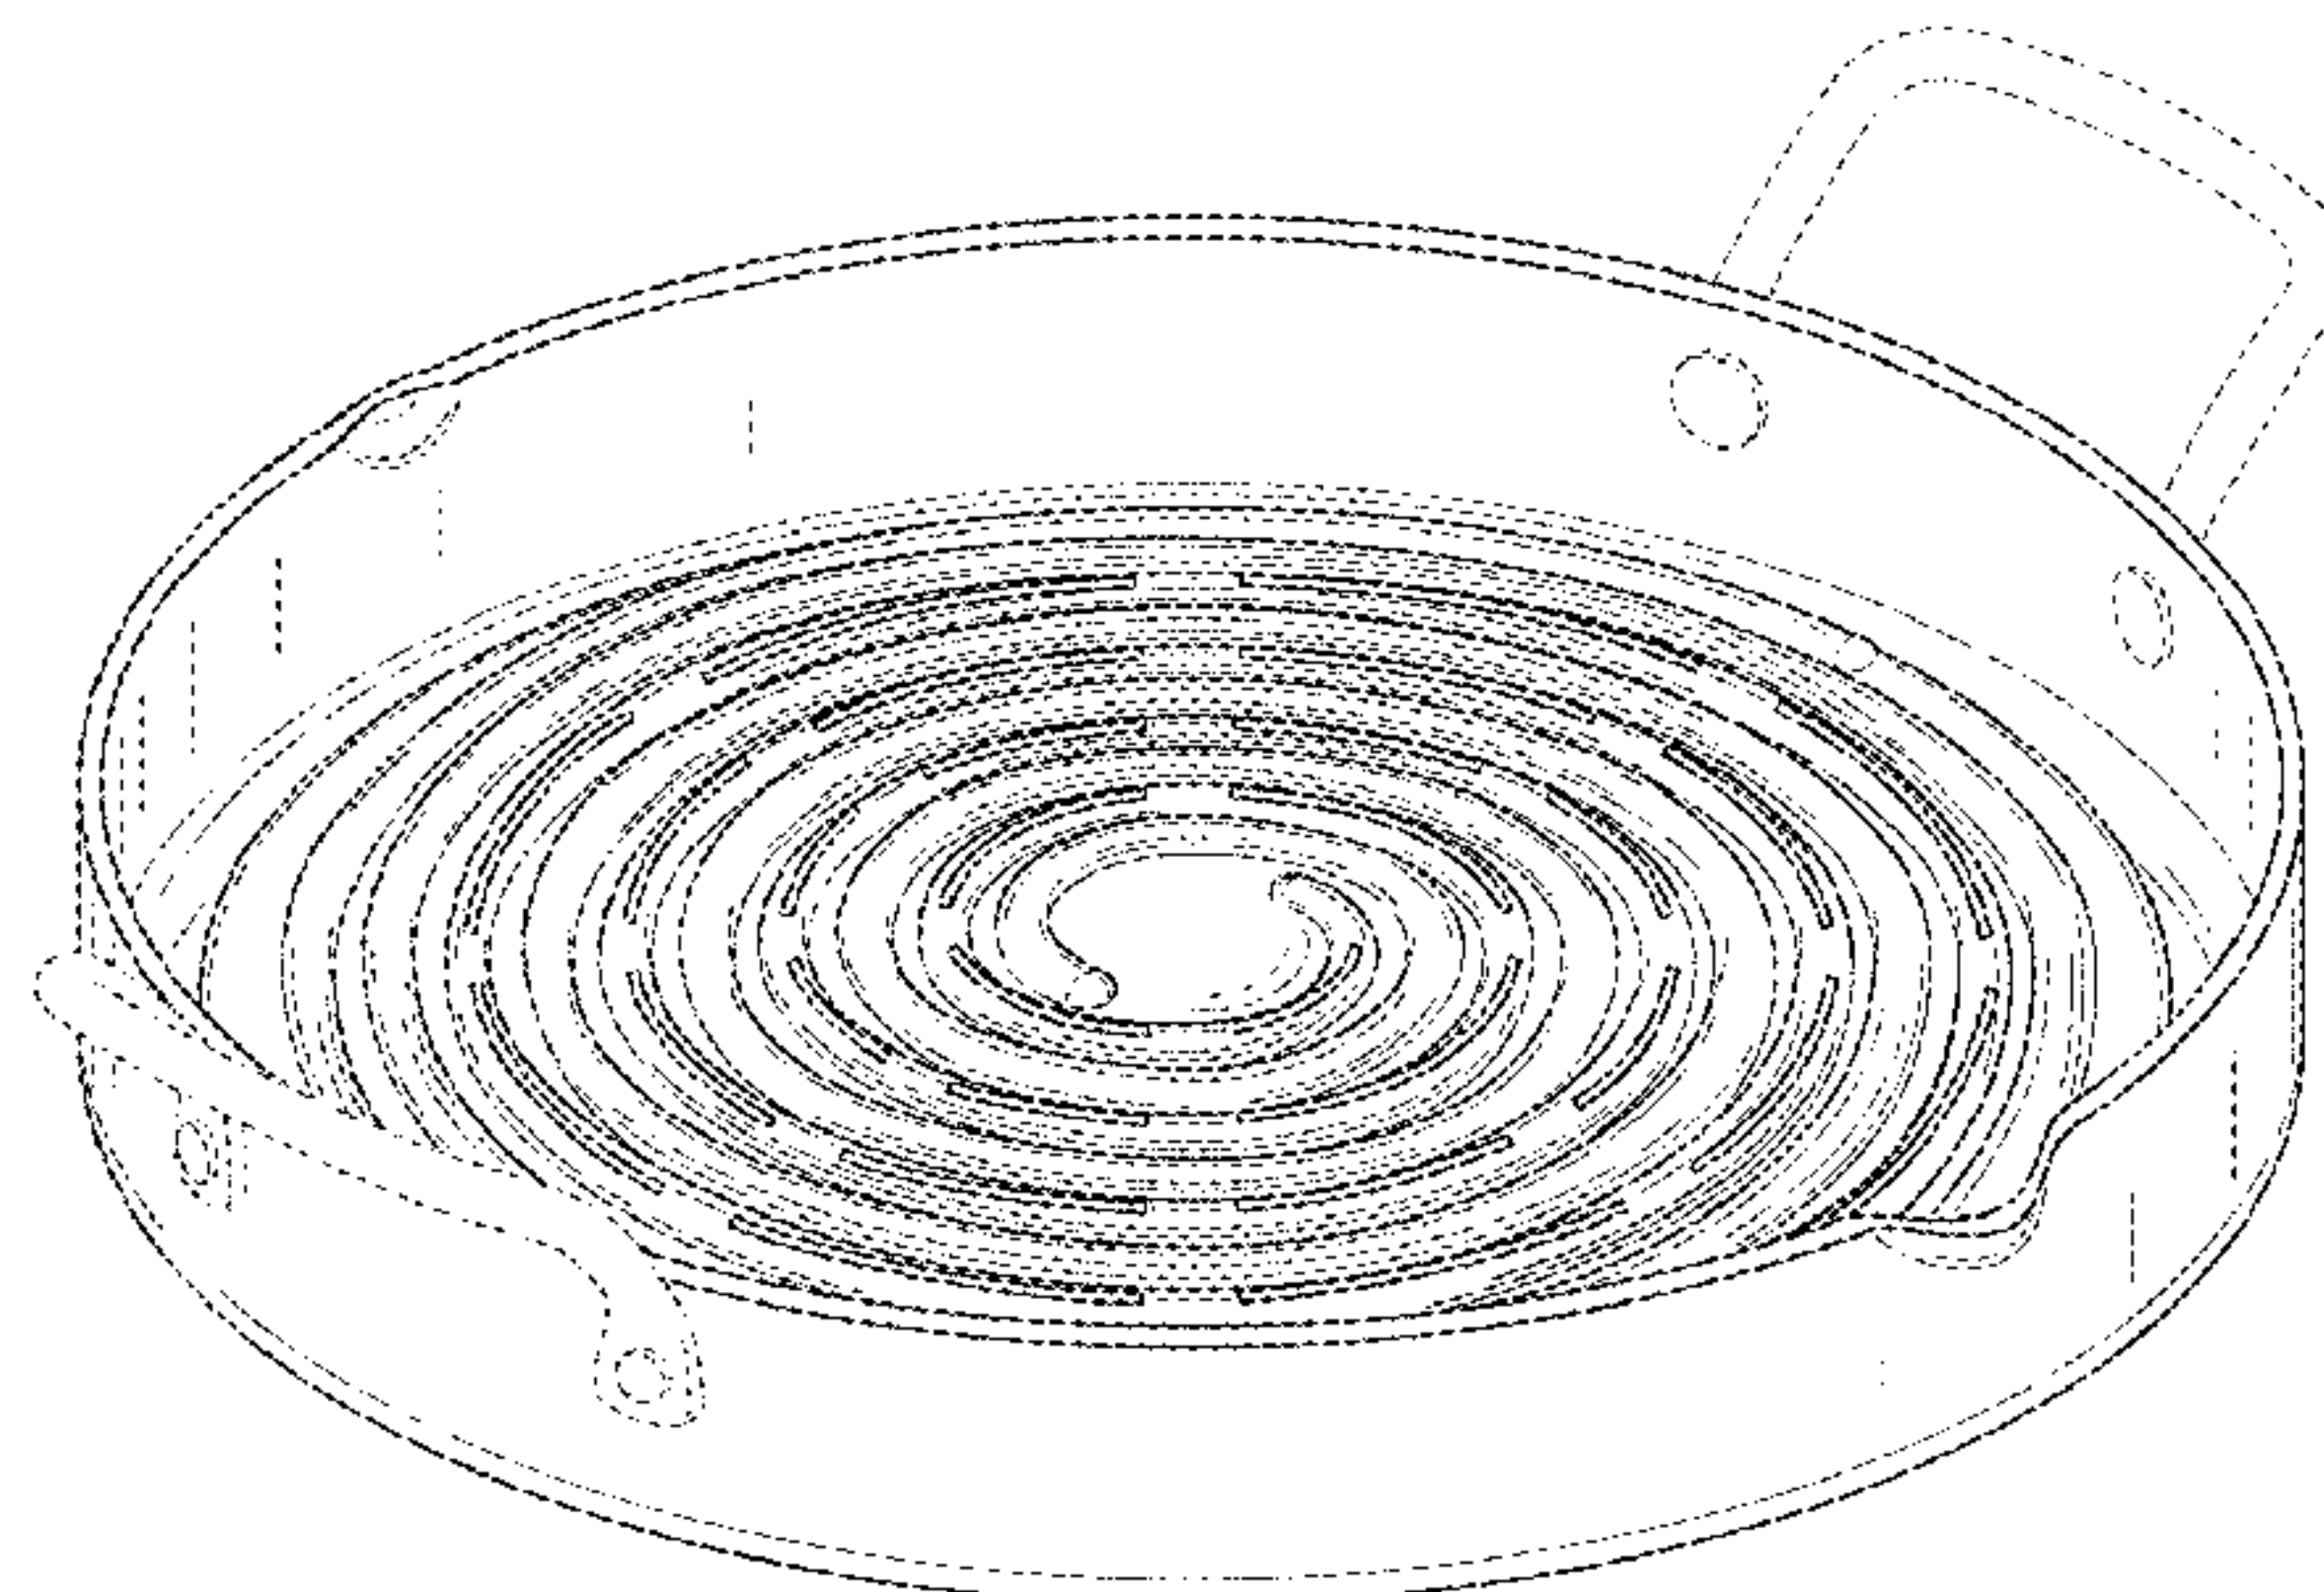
is a perspective view of the “circular grill pan”, showing our new design;
